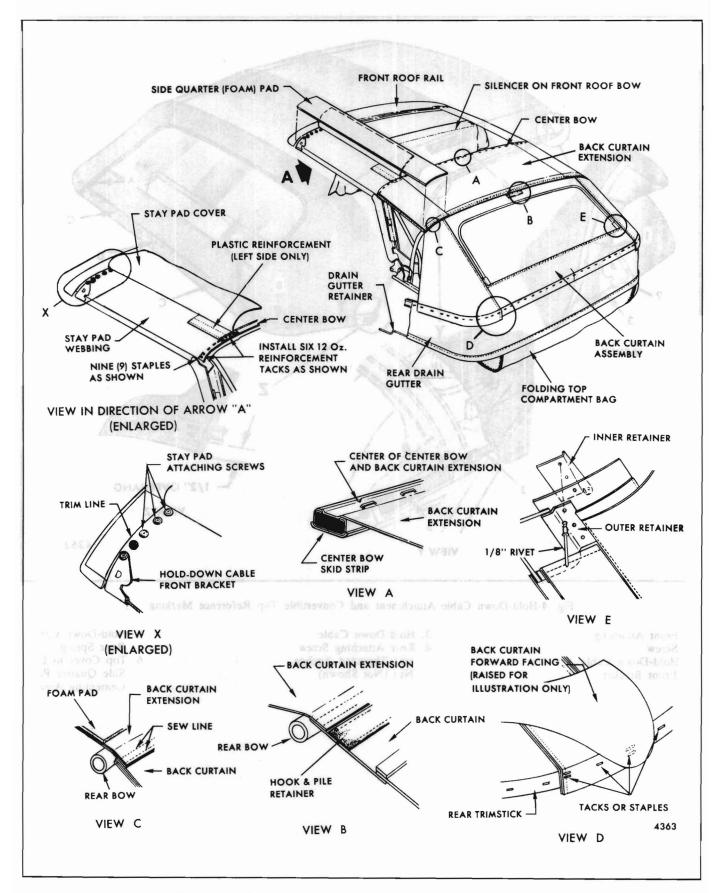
Back Curtain Assembly Attachment and Reference Marking
